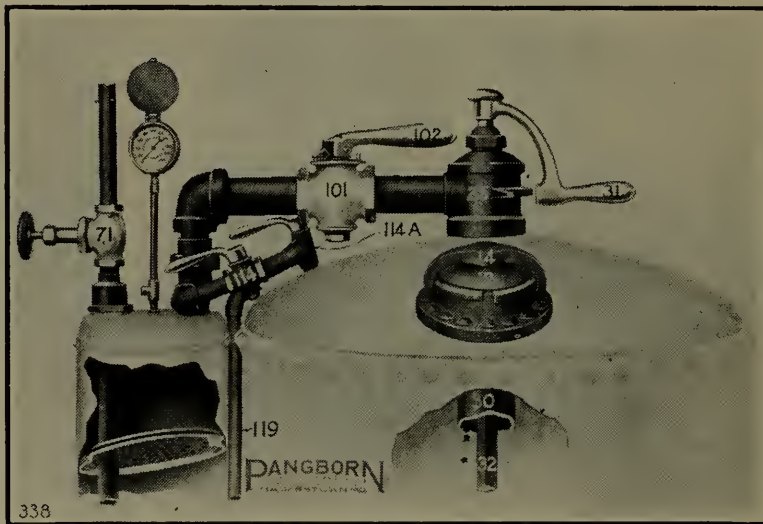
Air and Sand Control of Hose Sand Blast Machine.
